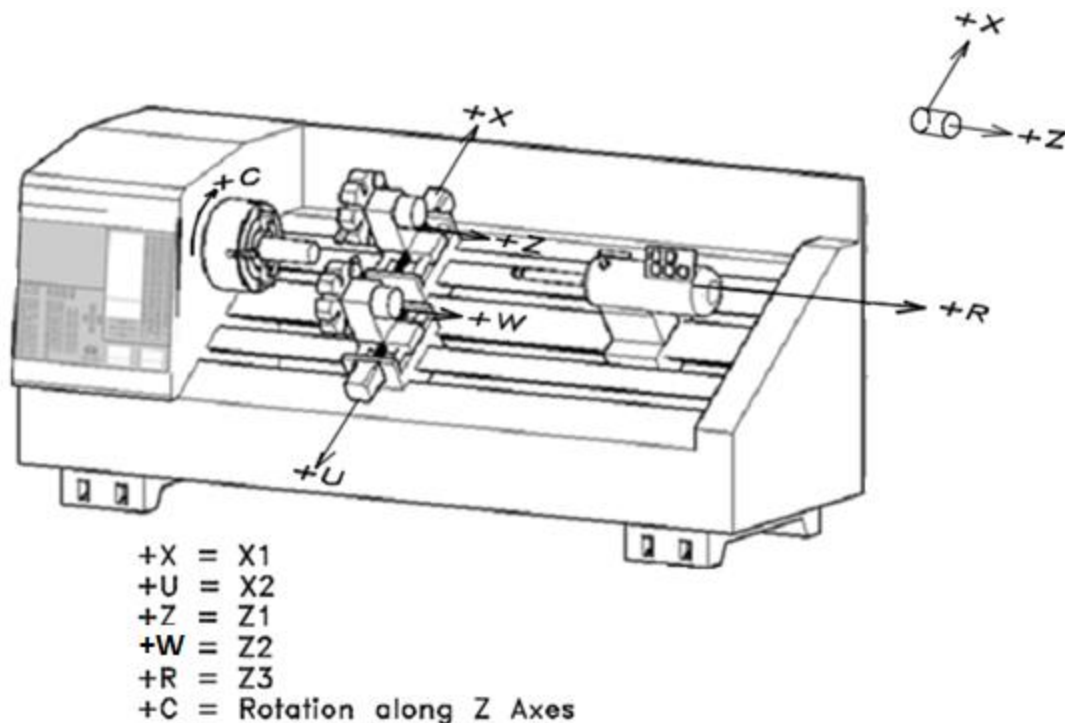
Coordinate System in Twin Turret CNC Lathe Machine
